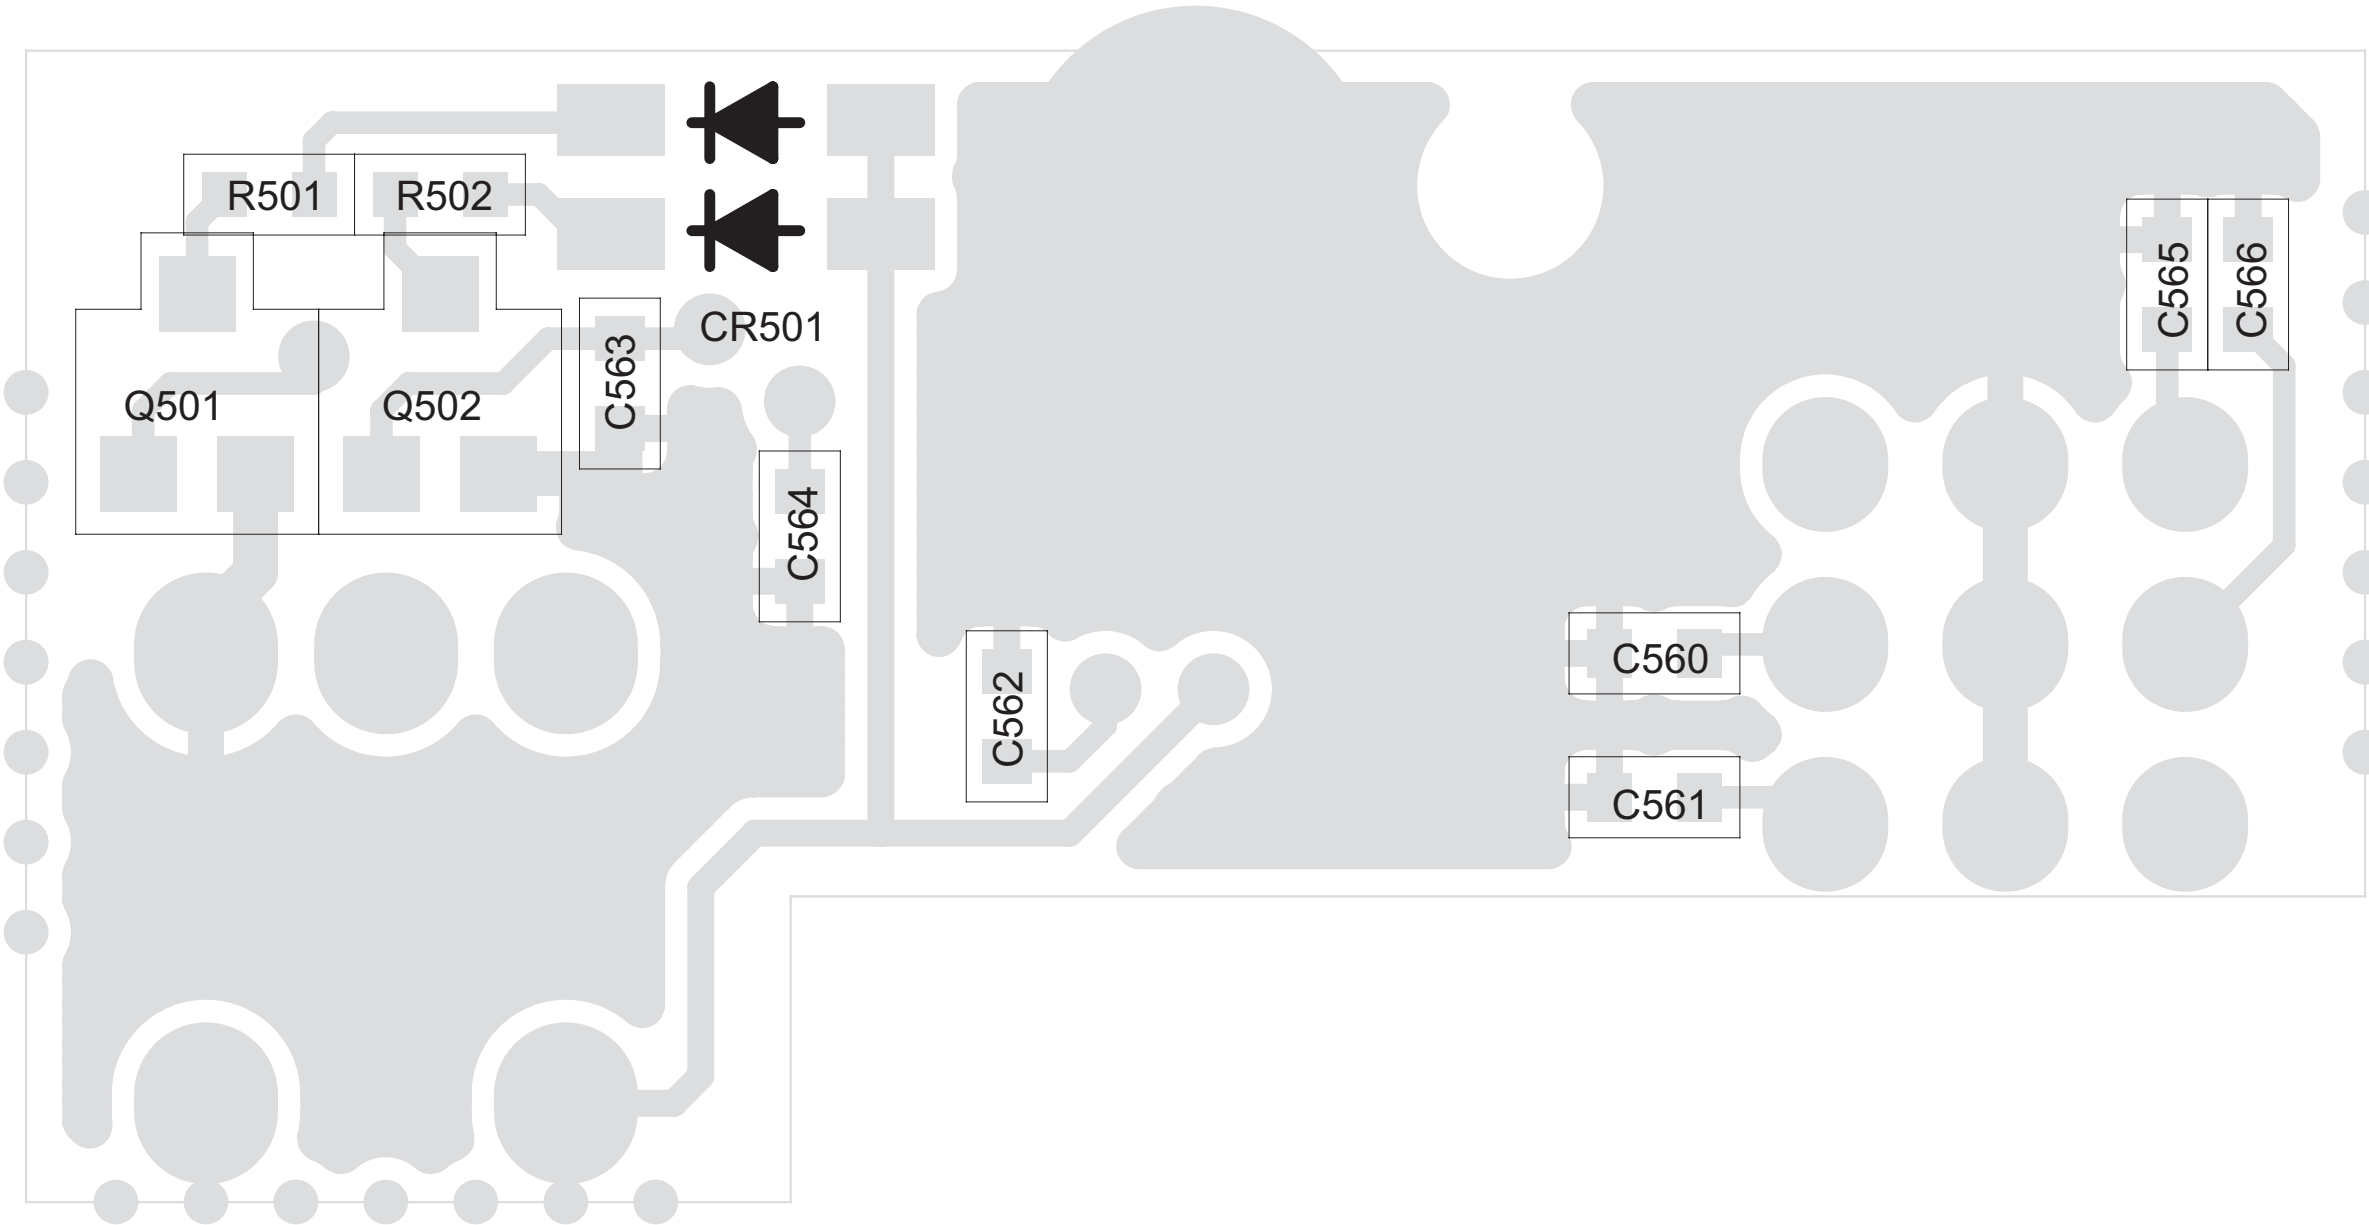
UHF1 (403–447 MHz) Sub Circuit Board Top View: PCB No. E11-000002-02
